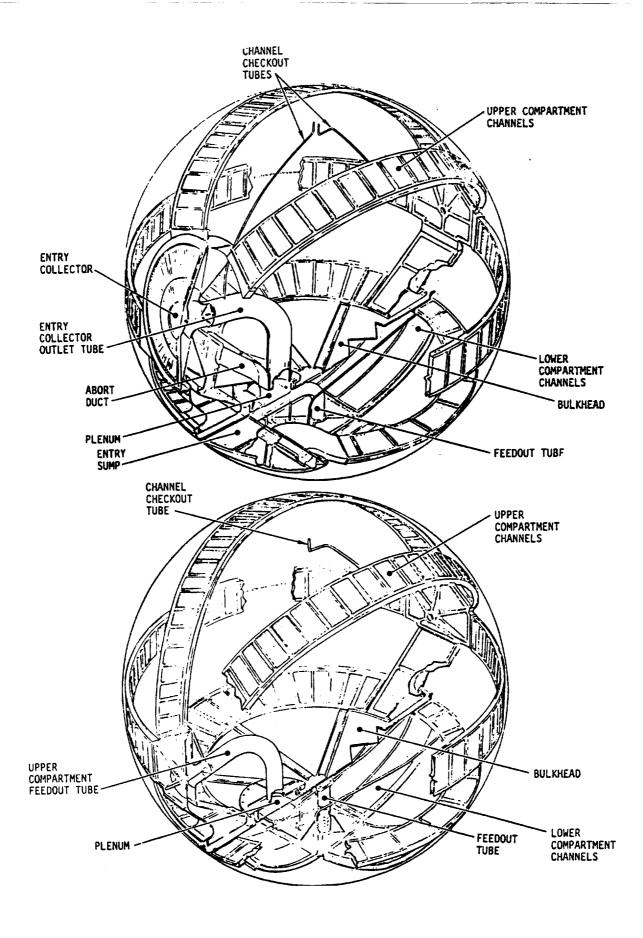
AFT AND FORWARD RCS PROPELLANT TANKS
